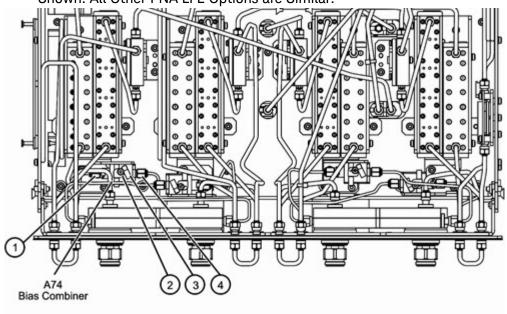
Remove Bias Combiner Bracket Assemblies from the Chassis (N5245-00036/N5245-00037, 0515-0372, 5087-7403, 0515-1227). (All Assemblies are Shown, but Only Remove the Defective Assembly.)
